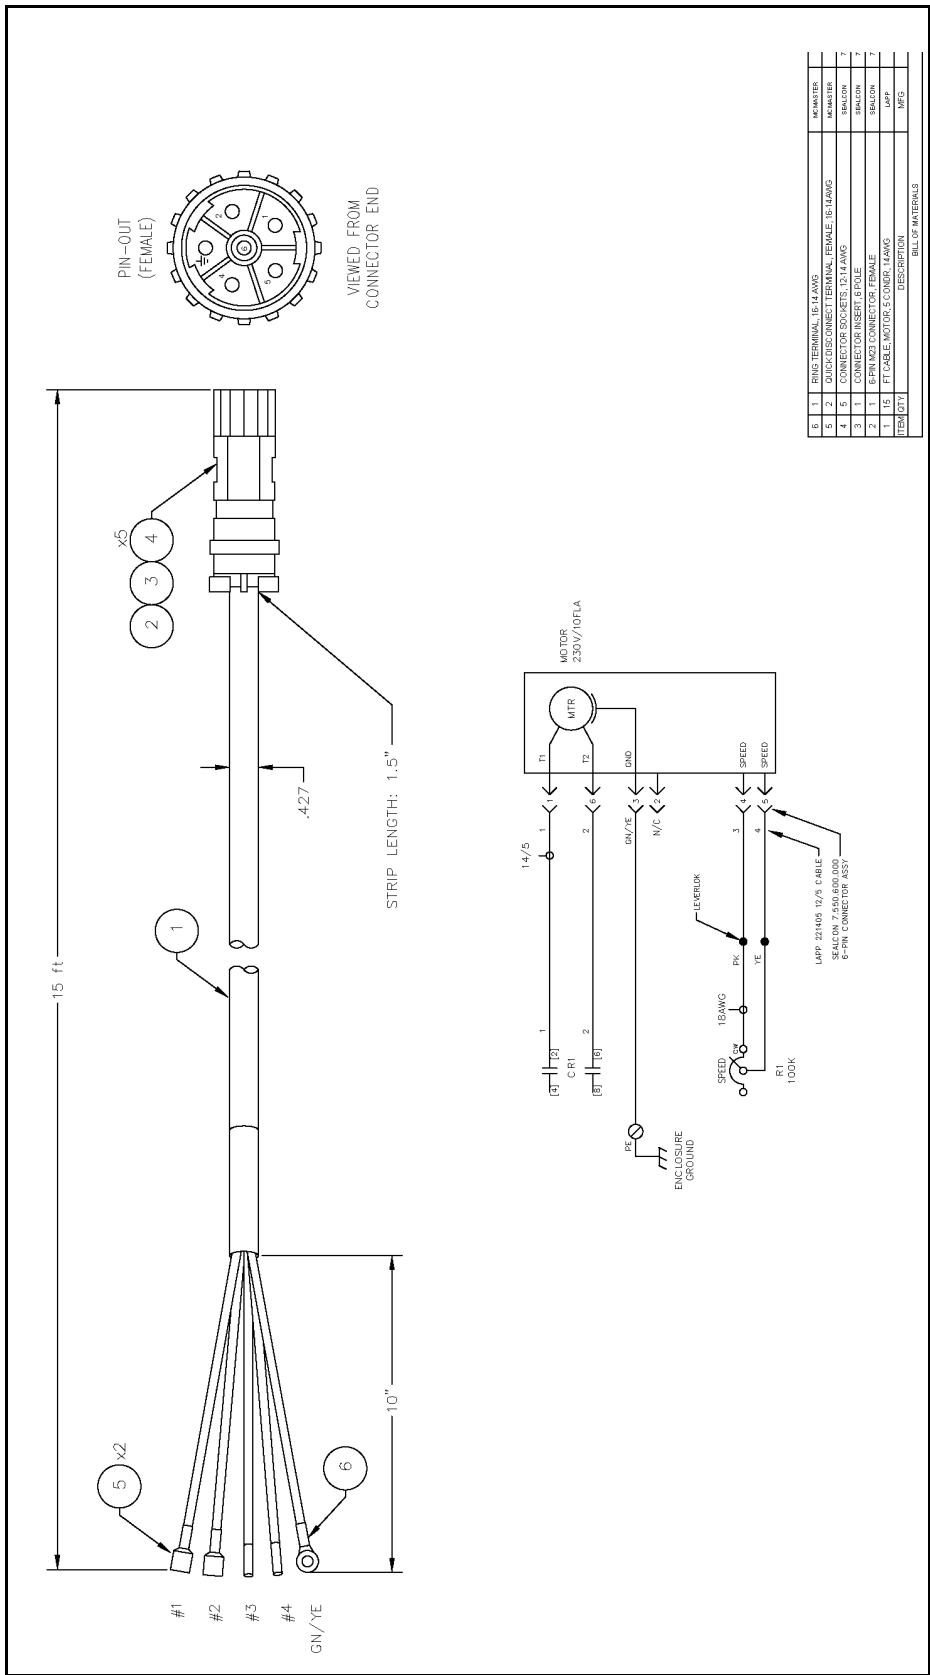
BB5000 SERVO MOTOR 230VAC AND 460VAC POWER CABLE ASSEMBLY (P/N 91811 E00048)
